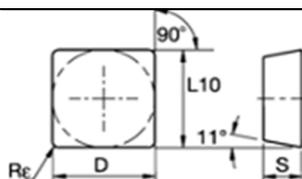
Tungsten carbide cutting tool insert commercially made by Sumitomo.
